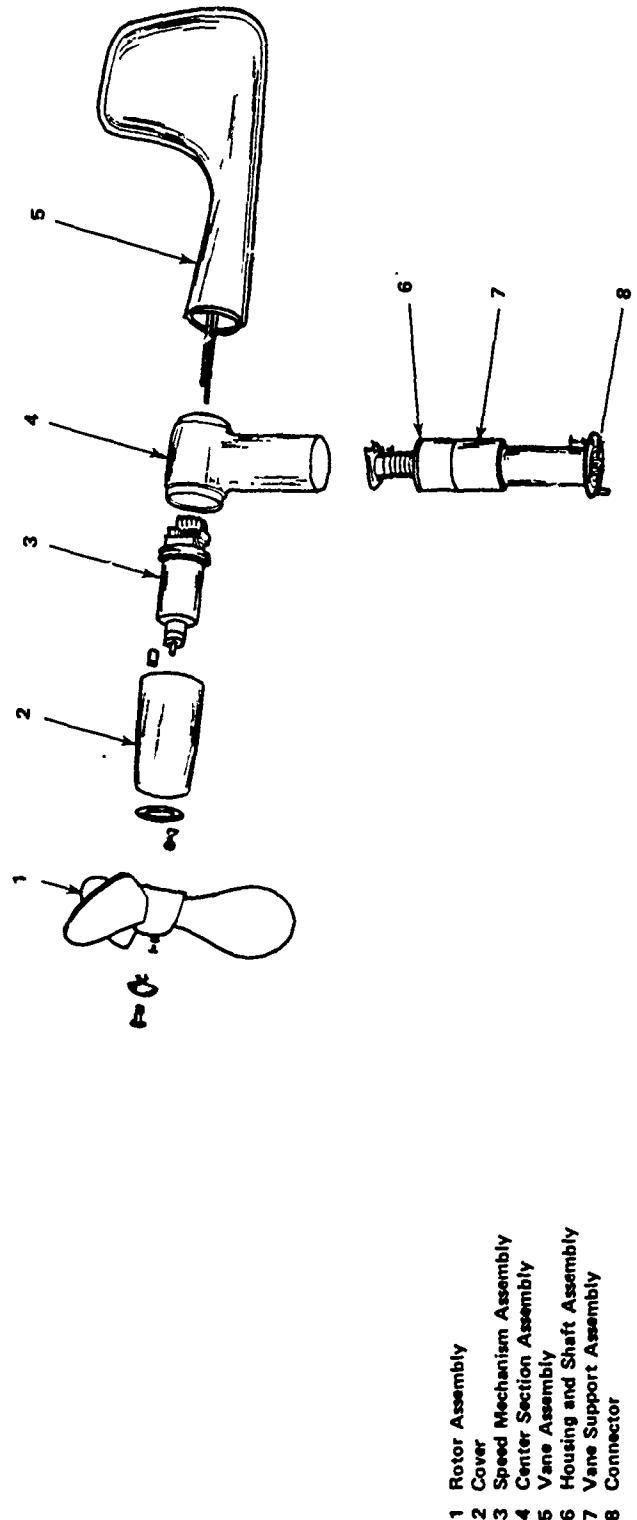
DETECTOR UNIT, TYPE B (EXPLODED VIEW)
